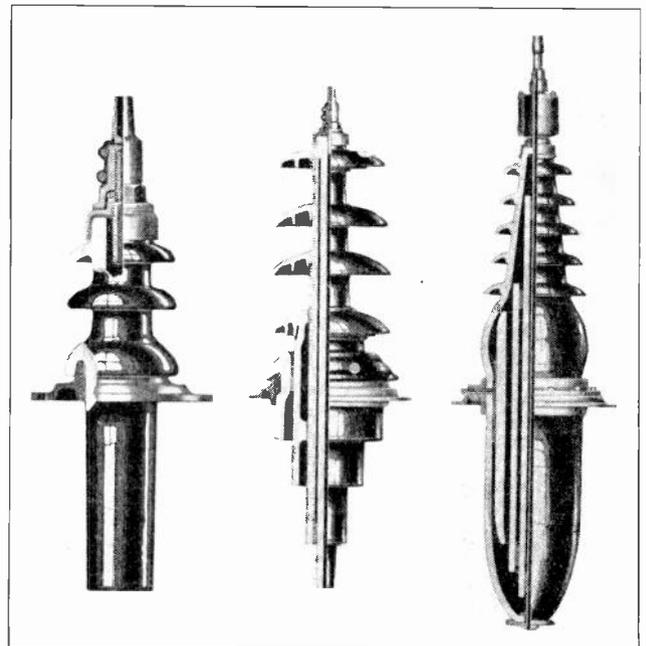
Three different types of insulator bushings used for transformers and oil switches where the high-voltage conductors enter the metal tanks. Courtesy Ohio Brass Co.
